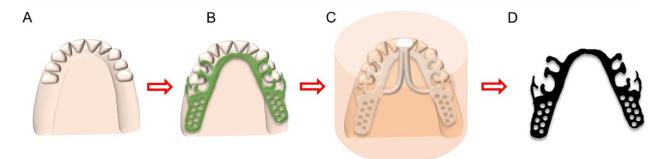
The fabrication process of the RPD metallic framework using the casting technique:
